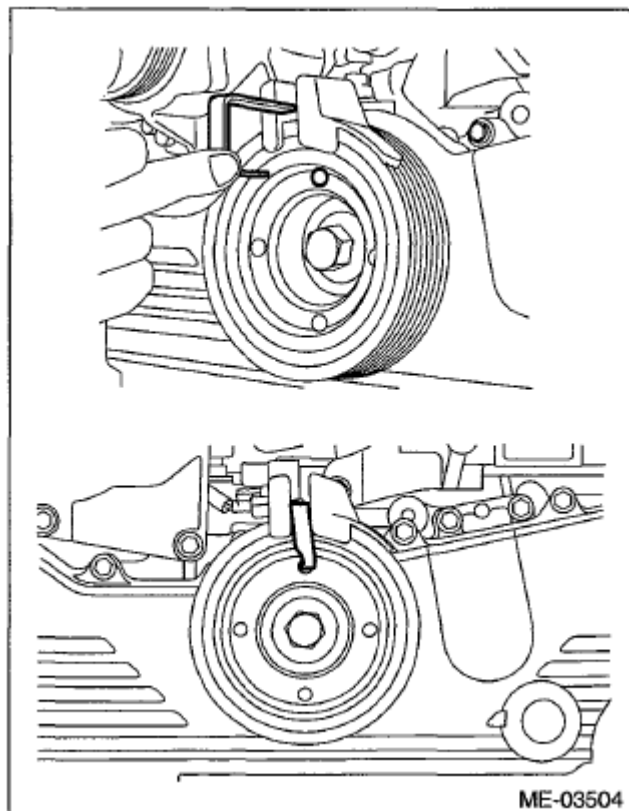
Inserting Belt Guide Holder Into Service Hole Of Crank Pulley
